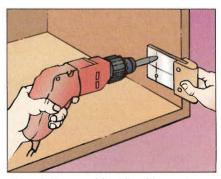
Use a predrilled jig with a center line to drill the holes for the mounting plate, using the reference lines you made earlier.
